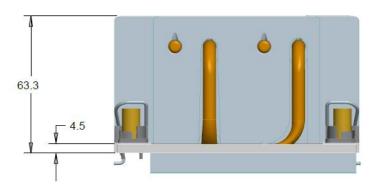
2U Delta Lake Maximum Heatsink Footprint
